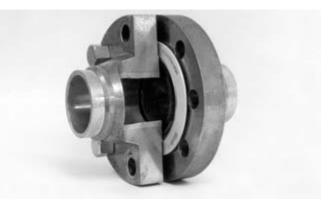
Flat ring gasket and flange. Courtesy of Flexitallic, Inc.
